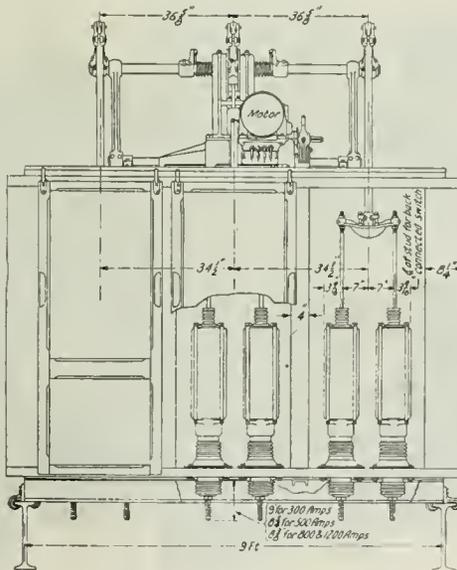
Type F Form H6 Oil Switch with poles arranged in tandem
